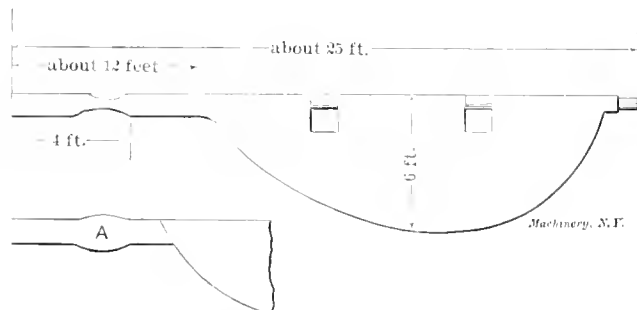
Rudder Frame, showing Worn Place in Stem.
